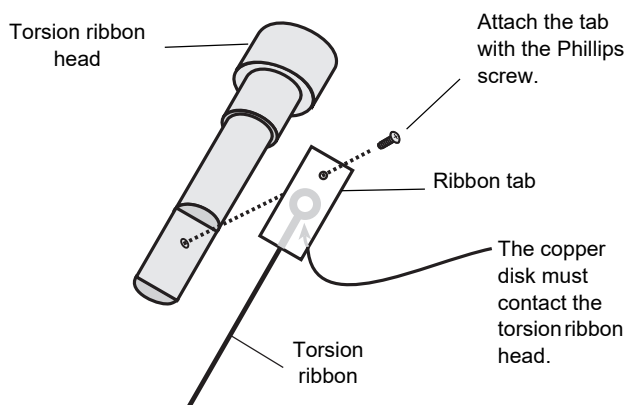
Attaching the top tab of the torsion ribbon assembly to the torsion ribbon head.
